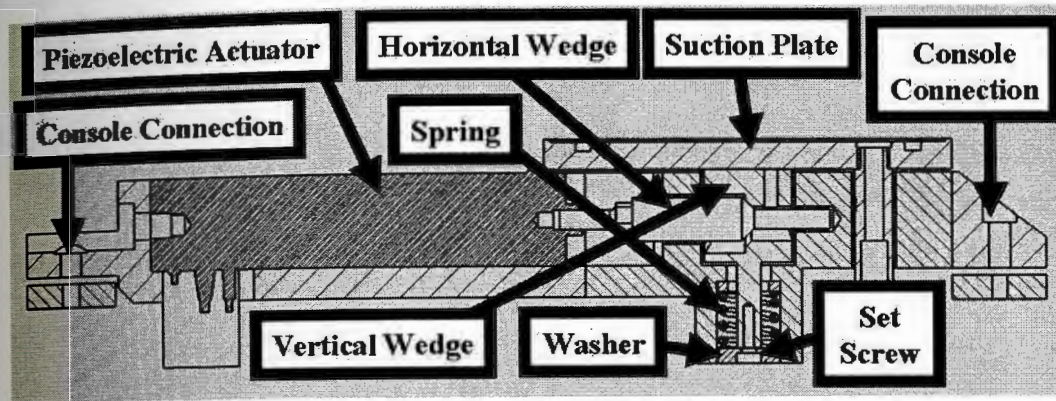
SolidWorks Generated Side Cutaway View Assembly
